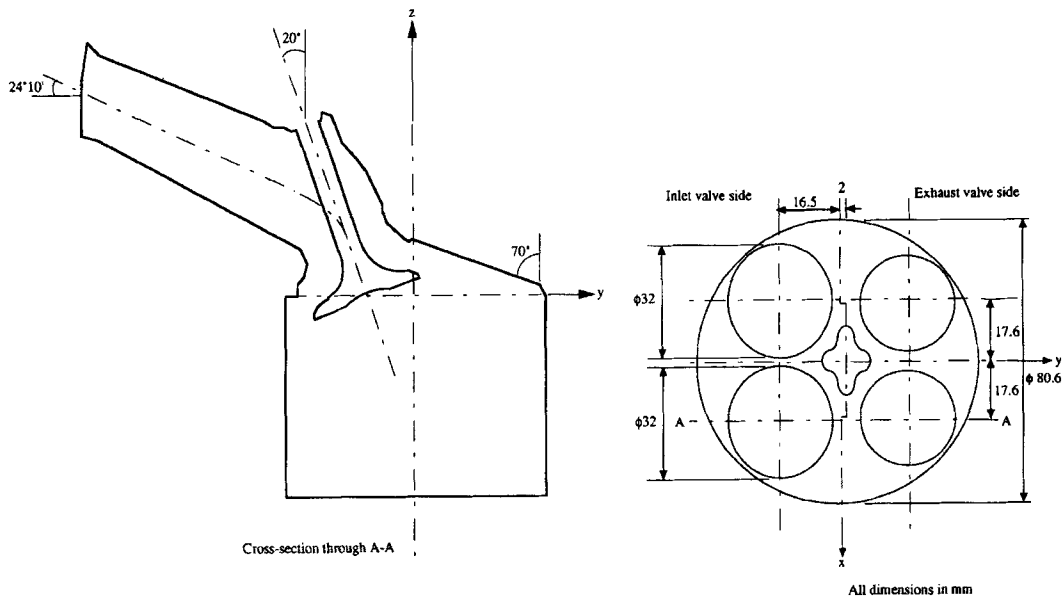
Outline of Ford Zetec engine intake port in a vertical plane through one inlet valve and cylinder head dimensions
